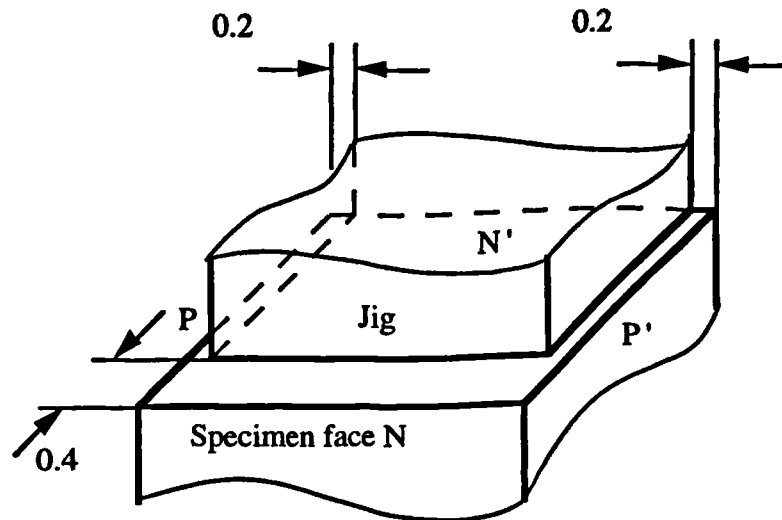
Oversized specimen Al2 bonded to the test fixture (dimensions in mm)
